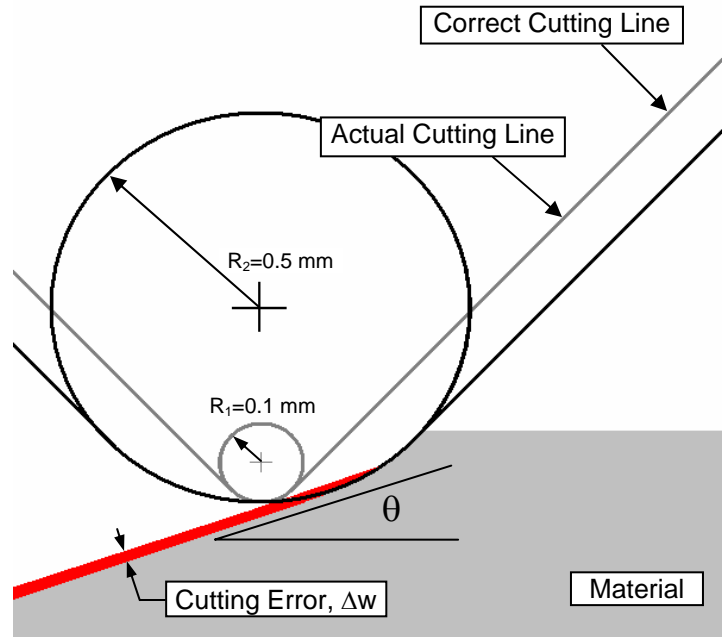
Cutting error for angles below 45°. The red region represents material that has been incorrectly removed. Tool path may be into or parallel to the page.
